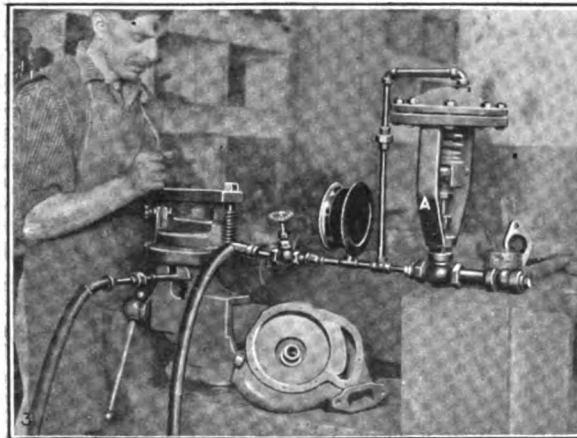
TESTING WATER PUMP CASES. FIG. 4. WASHING PARTS BEFORE ASSEMBLY
